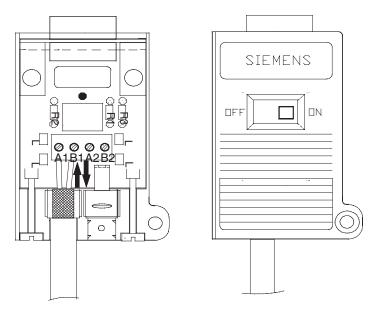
Connecting the bus cable to bus connector (6ES7 972-0E
